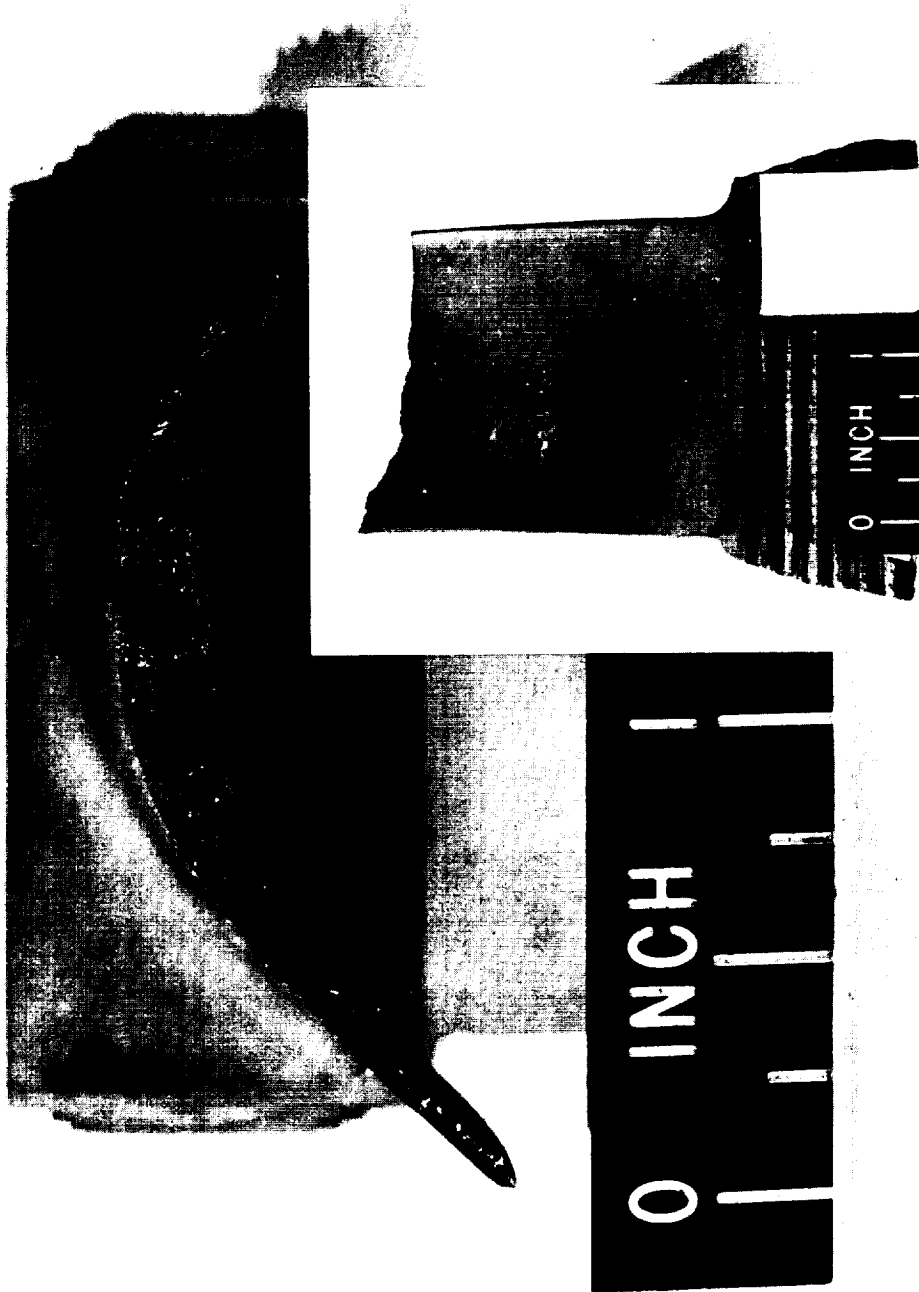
Continued. Types of bucket failures resulting from engine testing.
